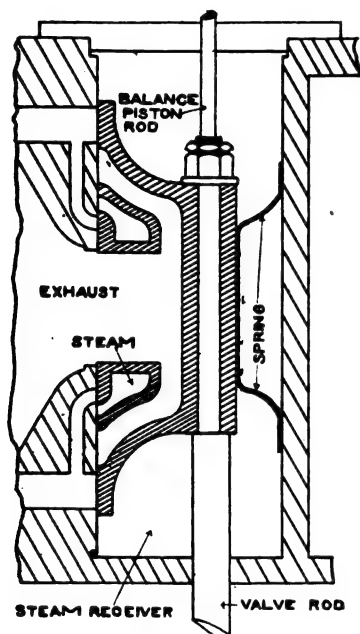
Sectional Diagram of Steam Slide Valve, with Arrangement for Balancing the Weight of the Valve.
